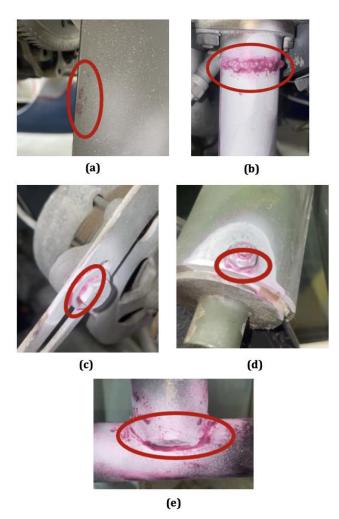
(a) Propeller Blade; (b) Modified Exhaust Engine; (c) Uncoated Bolt and Nut; (d) Coated Bolt and Nut; (e) Towing Bar
